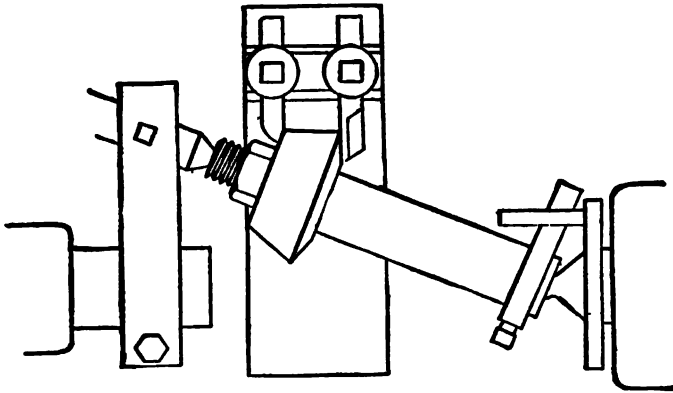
THE LATHE SET UP FOR BACK AND FRONT
